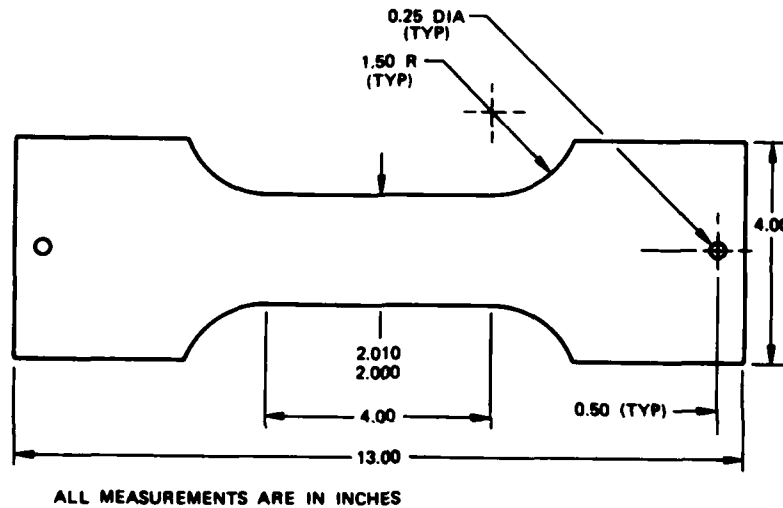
Dimensions and Shape of the Tensile Test Coupons.
